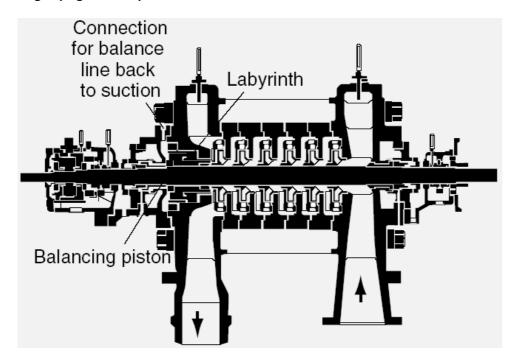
Axial Thrust Balancing in a Multistage Stacked Impeller Design
